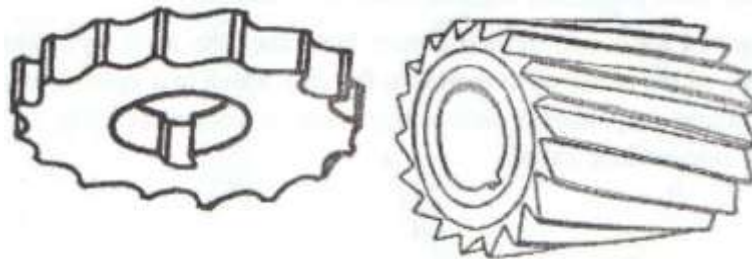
Plain Milling Cutter Fig. 1.25: Slab Milling Cutter
